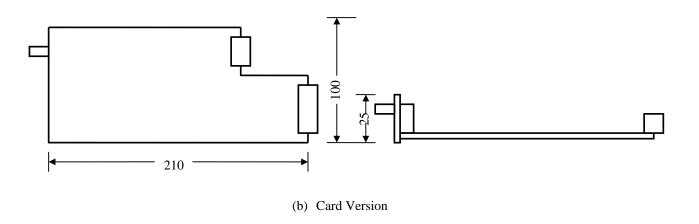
OSD818S CASE MOUNTING DIMENSIONS
